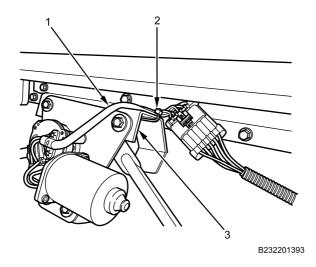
Windshield Wiper Motor Harness Cable Lock Strap.
